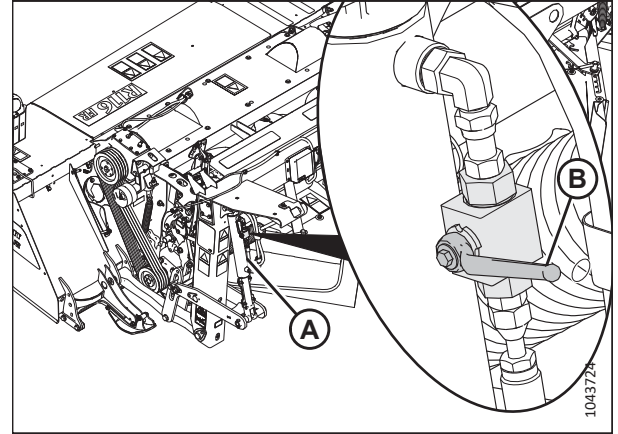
Auxiliary Lift Cylinders – Locked (Closed)
